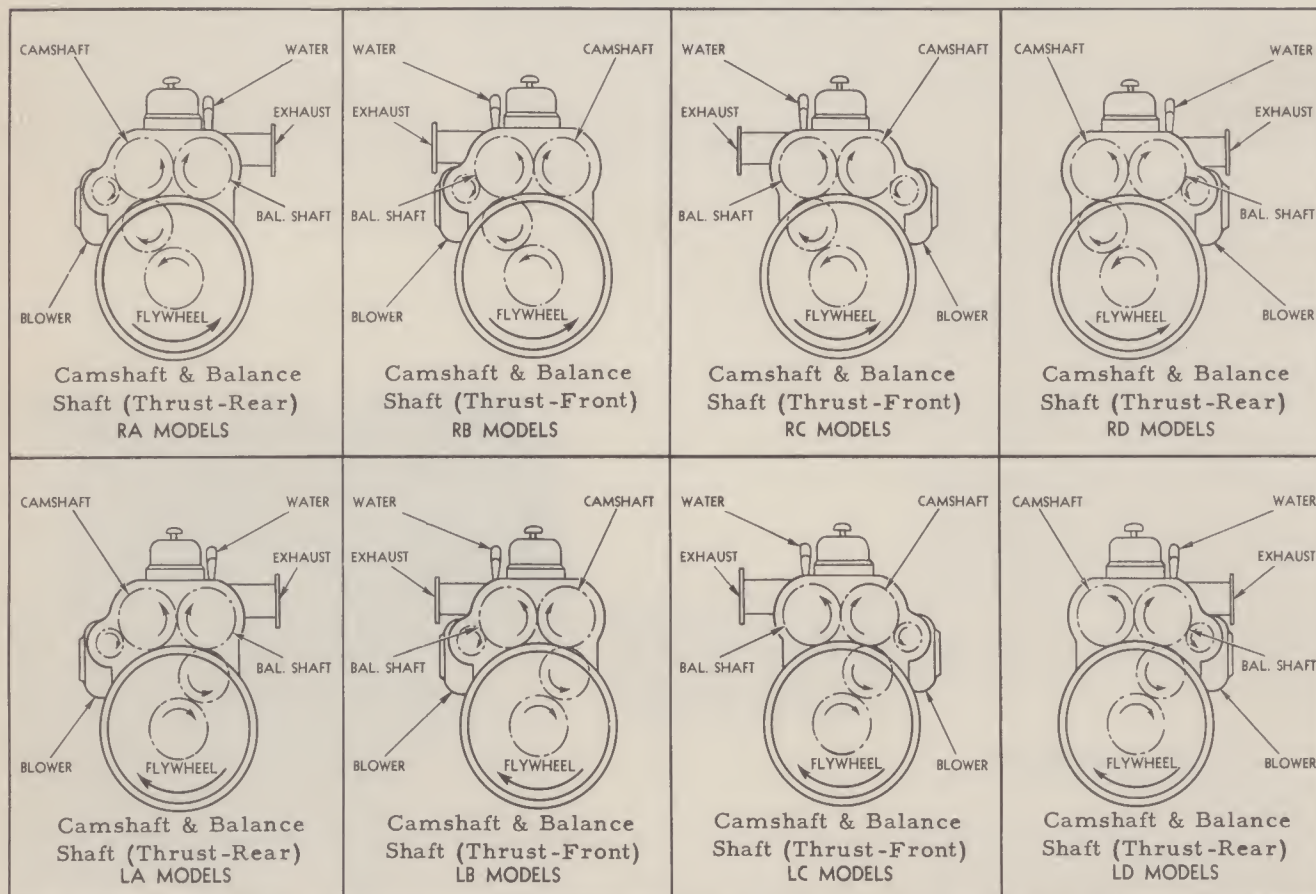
C—Rotation and accessory arrangements for 3, 4 and 6 cylinder, 2 cycle, series 71 GM engines. A model RB, 3 cylinder series 71 GM engine is used in the Oliver Super 99 GM tractor. Views are from flywheel end of engine.
